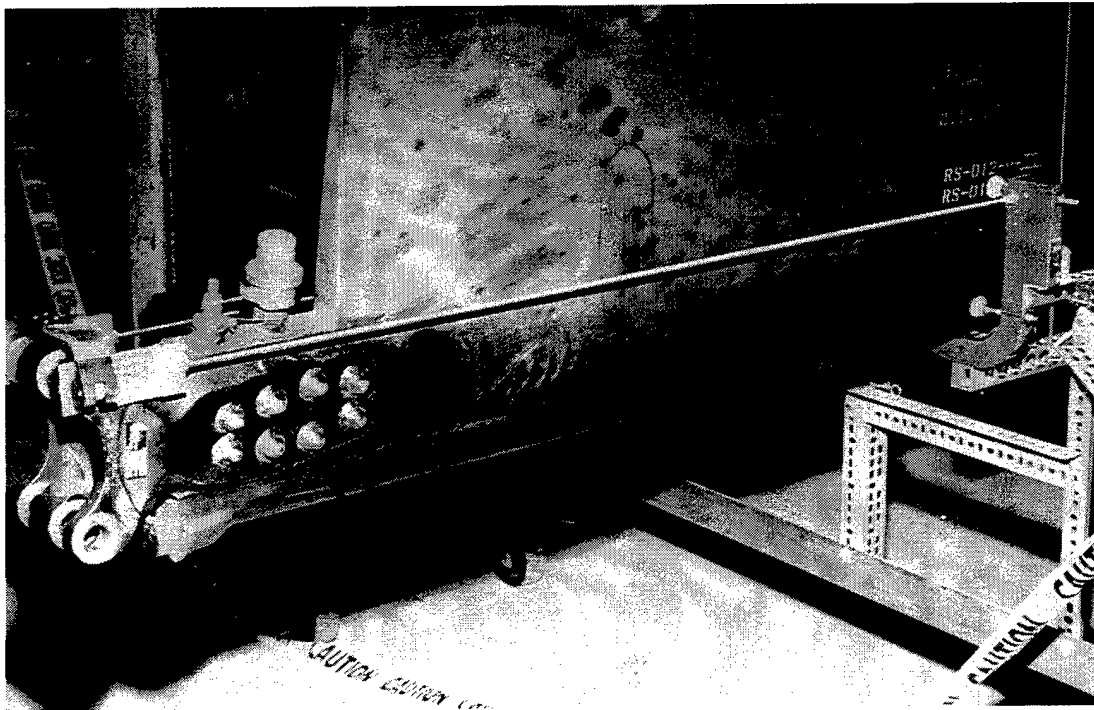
View of blade root positioning fixtures devised for Black Hawk blades
